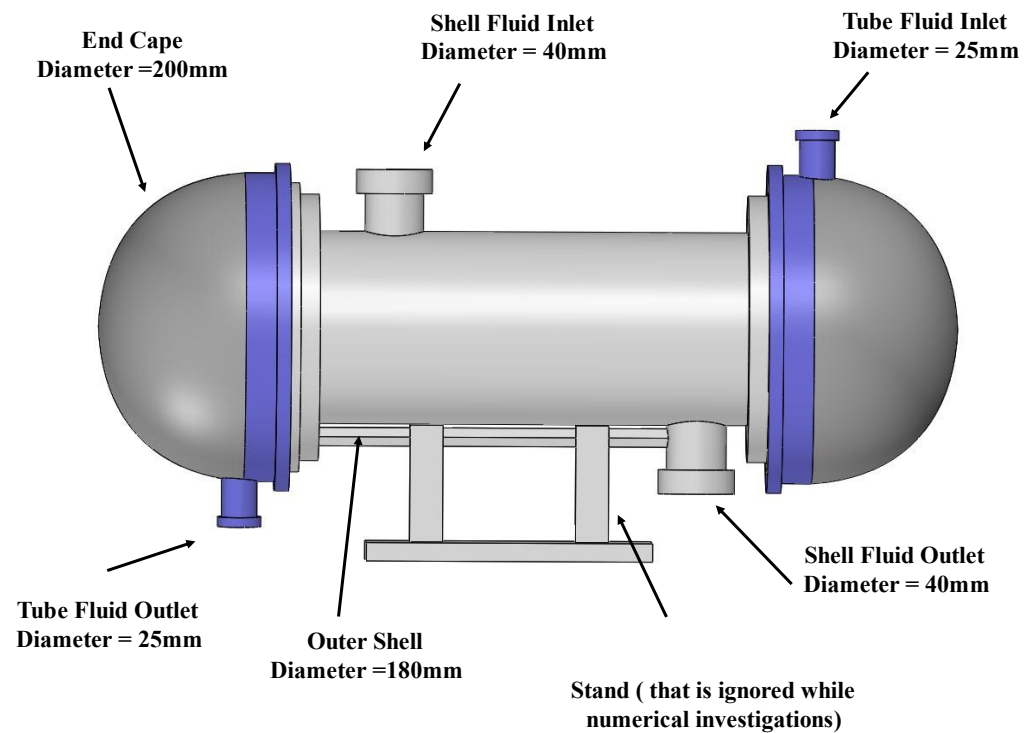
CAD Design of the Shell and Tube Heat Exchanger.
